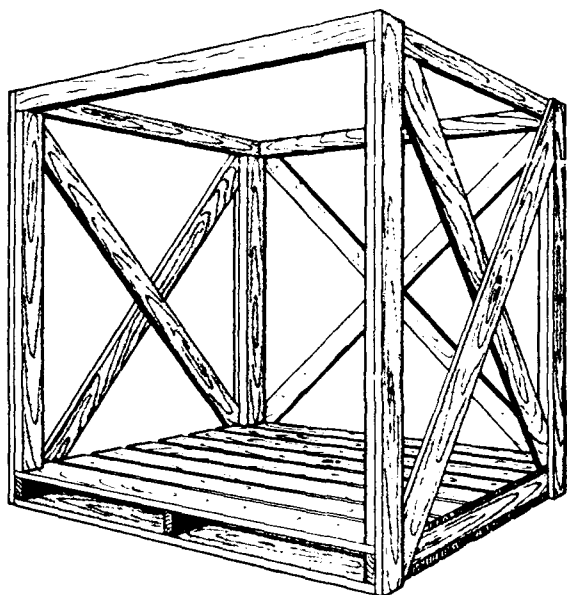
Pallet, box (may be constructed using flush or wing end type pallet)
